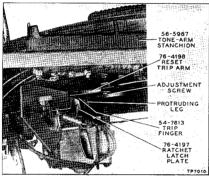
Trip Assembly, Showing Trip Finger Riding Over Ratchet Plate
